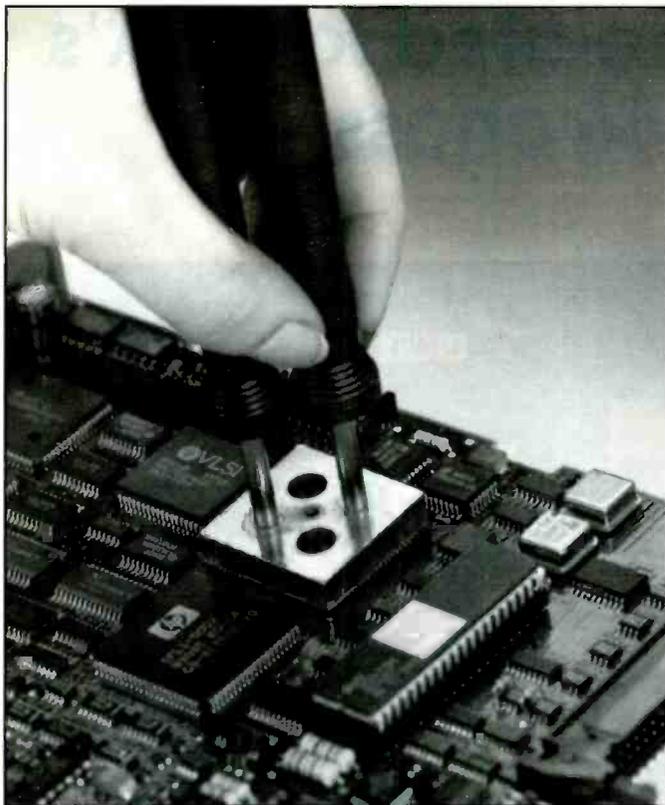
For larger components, some manufacturers make special tips that can fit in two handles and be used together.
